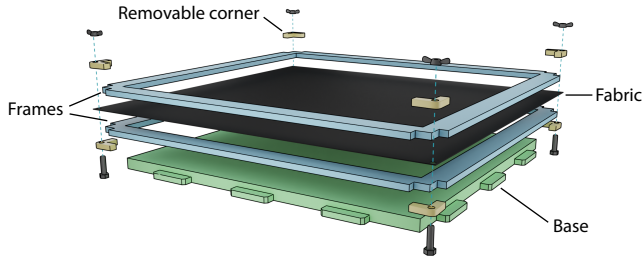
Our frame structure is composed of two rigid frames, in between which the fabric is clamped in tension. These frames sit on a base that attaches to the printer bed. The four corners of the frames can be removed to be fixed to the sheet of fabric before stretching.
